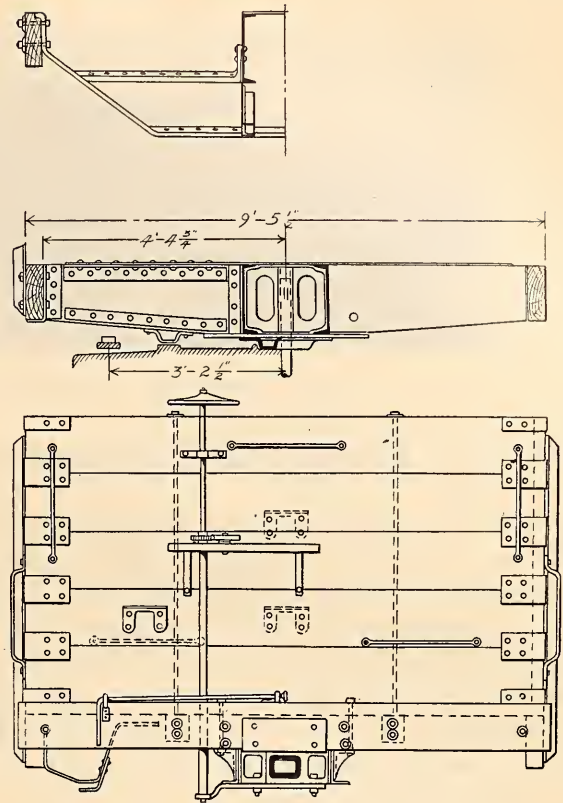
END ELEVATION, BOLSTER AND HOPPER BRACING OF HOPPER CAR WITH STEEL CENTER SILLS.
